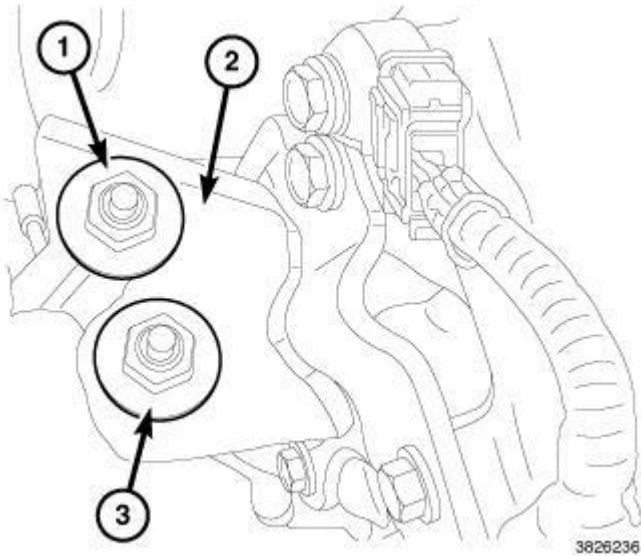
Upper Engine Bracket, Mount & Bolts - Left
